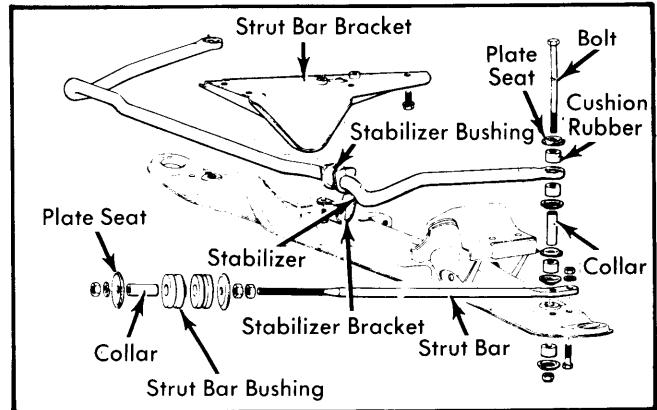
Exploded View of Arrow Strut and Stabilizer Bars
